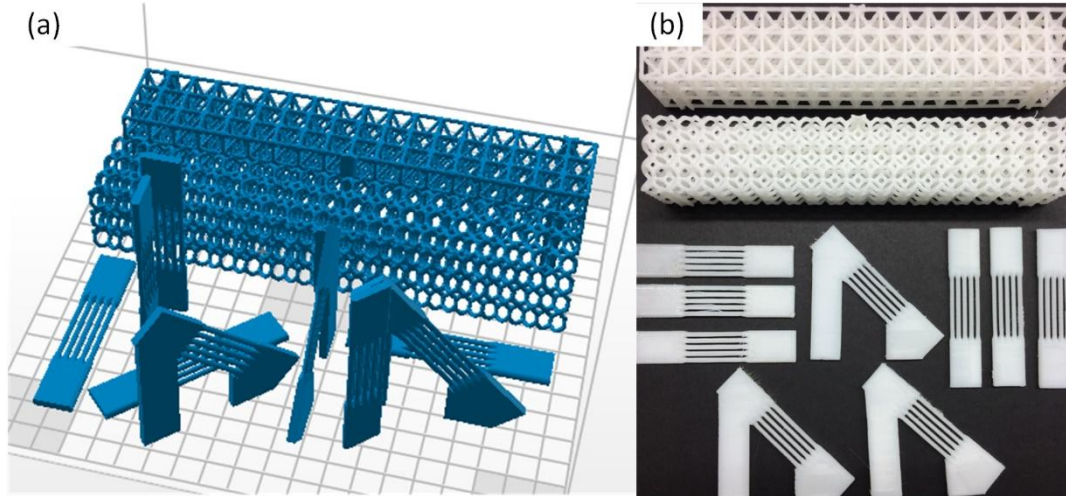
(a) Printing set-up for the lattice structures and the tensile specimens. (b) as-built samples.
